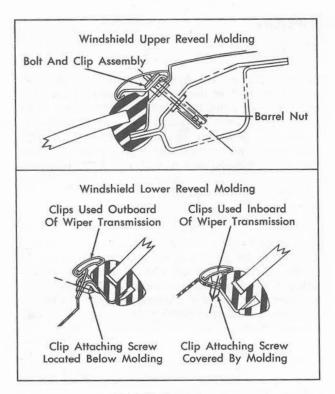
Windshield Reveal Moldings and Attaching Clips
